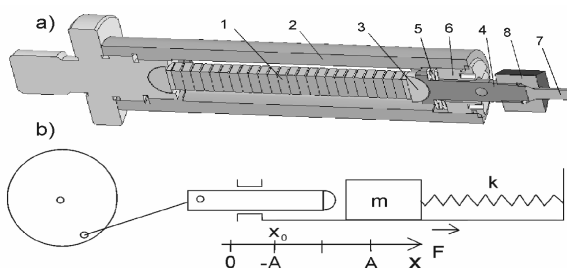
Piezoelectric vibrator: a) technical drawing: 1- piezo-stack, 2- housing, 3- ball joint, 4- head, 5- pre-stressing springs, 6- bolt, 7- tool, b) mechanical scheme
